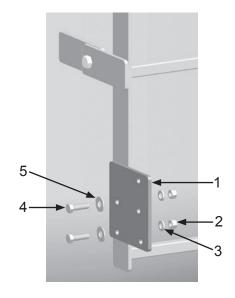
Installation:* 1) Install Ladder Extension Bracket (1) using Bolts (4), Washers (5), Lock Washers (3),
